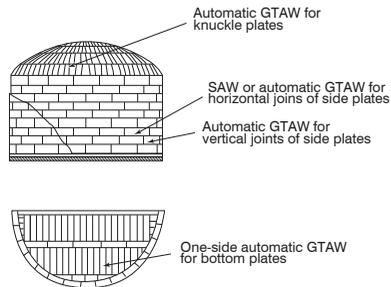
Typical applications of automatic welding processes for a LNG storage tank
